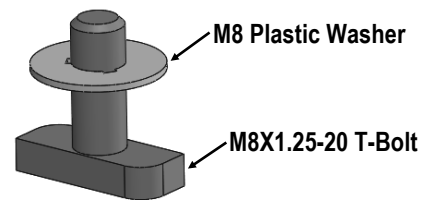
Driver Center/ Rear Mounting Bracket Installation
